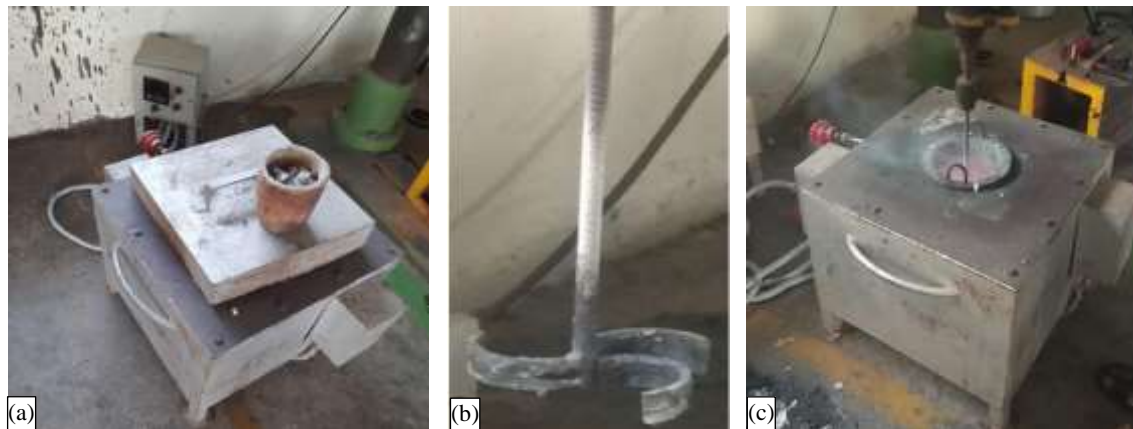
Experimental stir casting apparatus shown in (a) Stir casting furnace. (b) Stirrer rod. (c) stir casting setup
